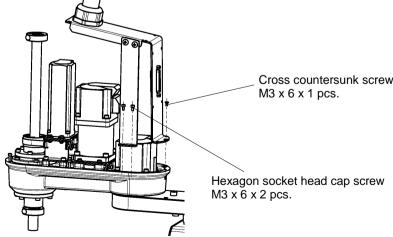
Dismounting harness guide and support plate (KHL-300, KHL-400)
